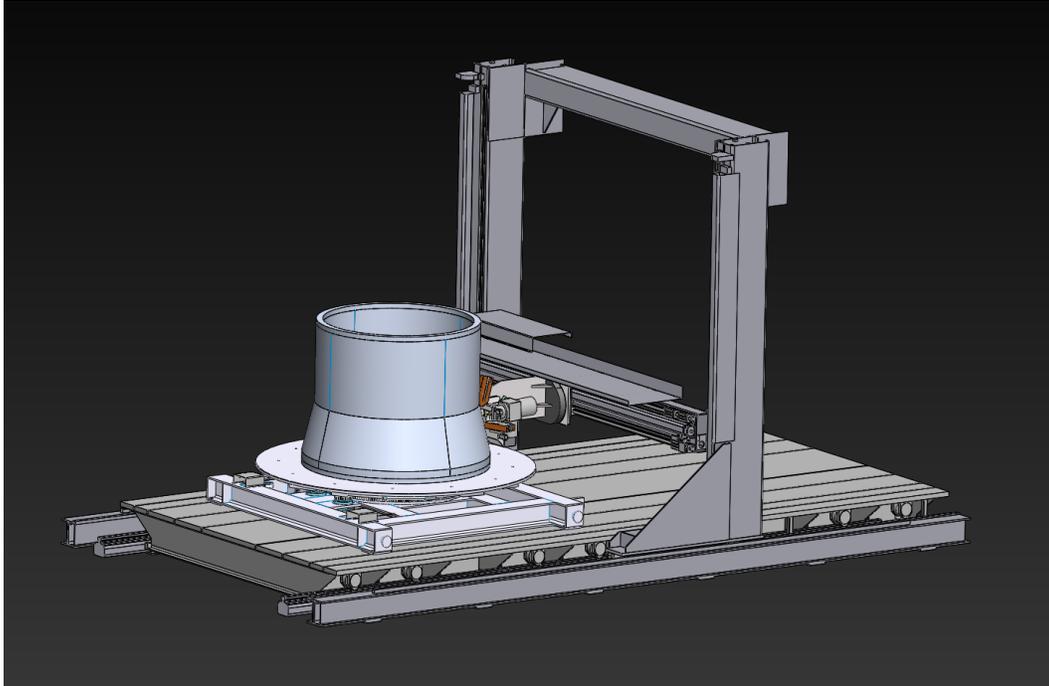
Upper transition shell which consists of 4 individual PM-HIP sections joined via vertical EB welds. EB welds are shown in blue.
